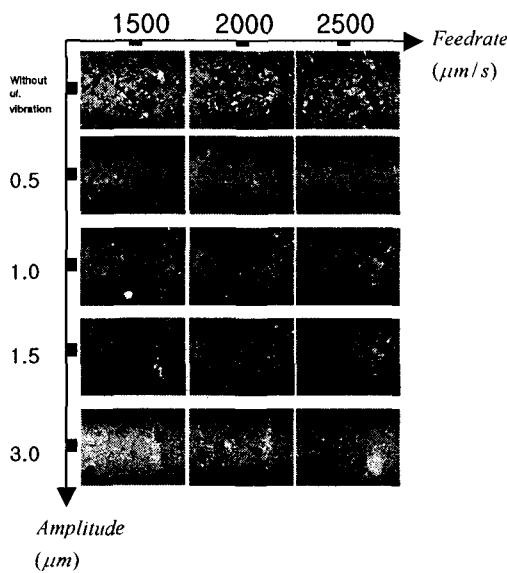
The photographs of the internal surfaces of micro holes (LSM)
